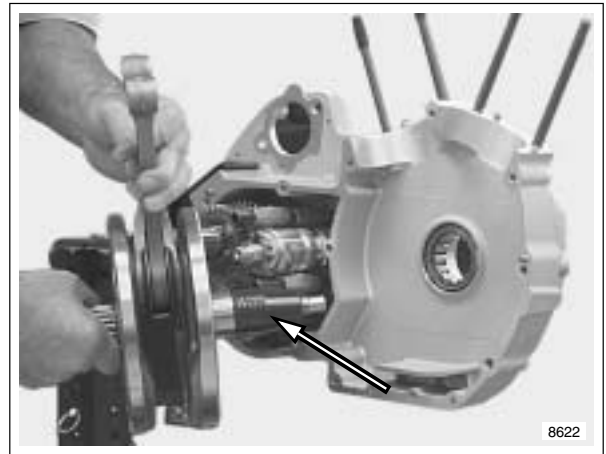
Installing Flywheel Assembly with CRANKSHAFT GUIDE (Part No. HD-42326)
